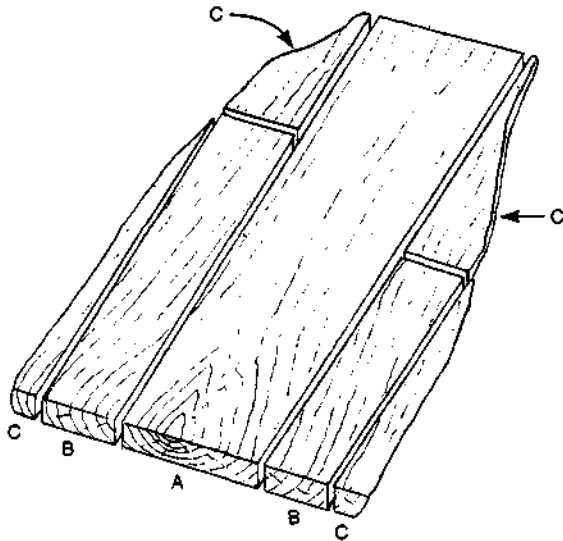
A6 Edge trimming of boards cut from logs. Part A is the maximum size board that could be cut from the flitch. Parts B are shorter and narrower pieces that could also be cut where the log was larger. Parts C are scrap which may be used as material for particle board or other wood-fiber products.
